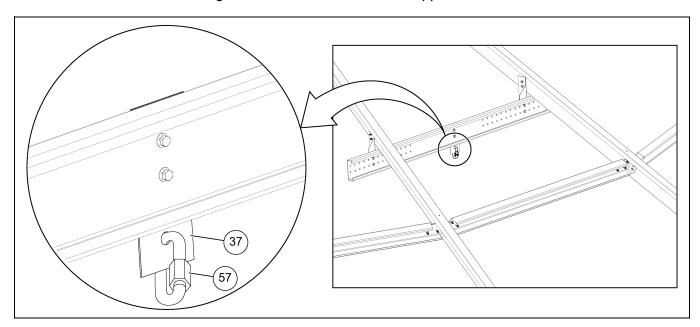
R Installing the Supplier Quick Link to the Hanging Bracket
